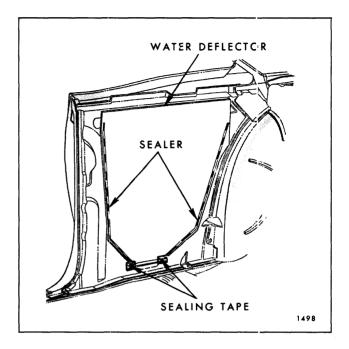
Rear Quarter Inner Panel Sealing - Typical of Water Deflector Installation
